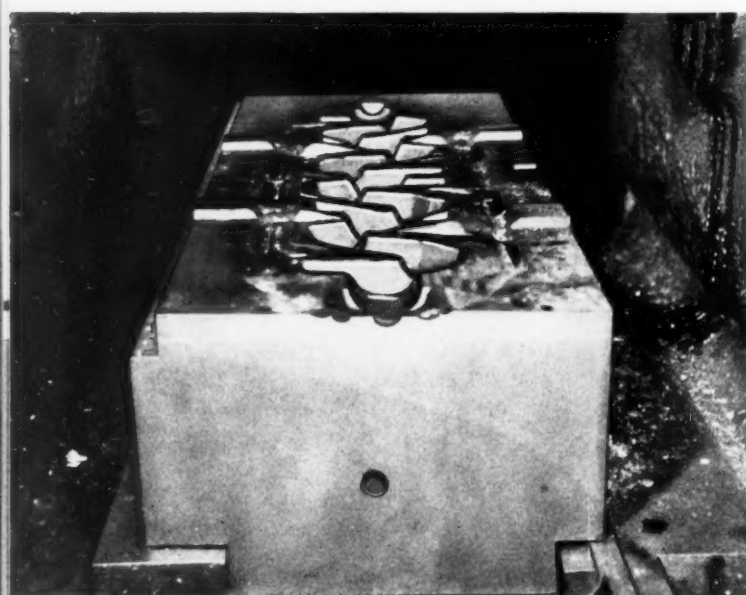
Finish-forging Buick Crankshafts in a 12,000-pound Steam Hammer
